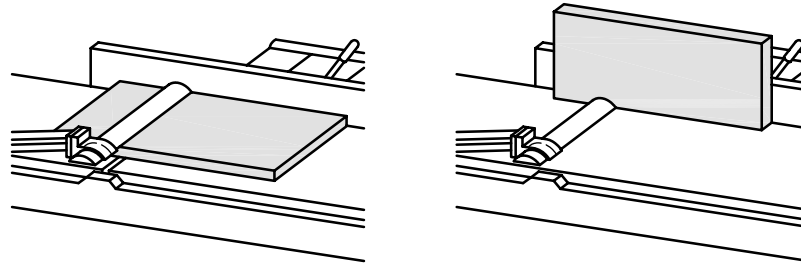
Typical surface planing operations: planing (left) and edging (right)
